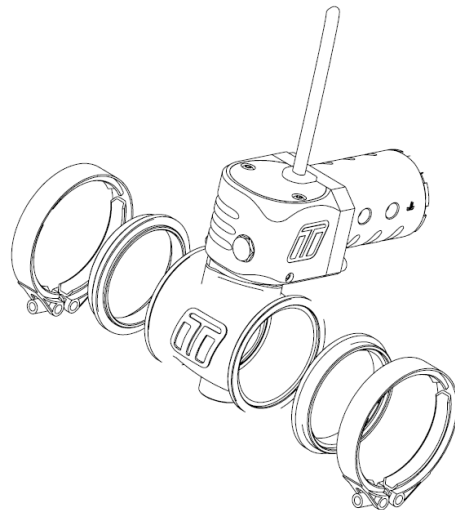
Exploded drawing of assembly of Electronic Straight Gate.
